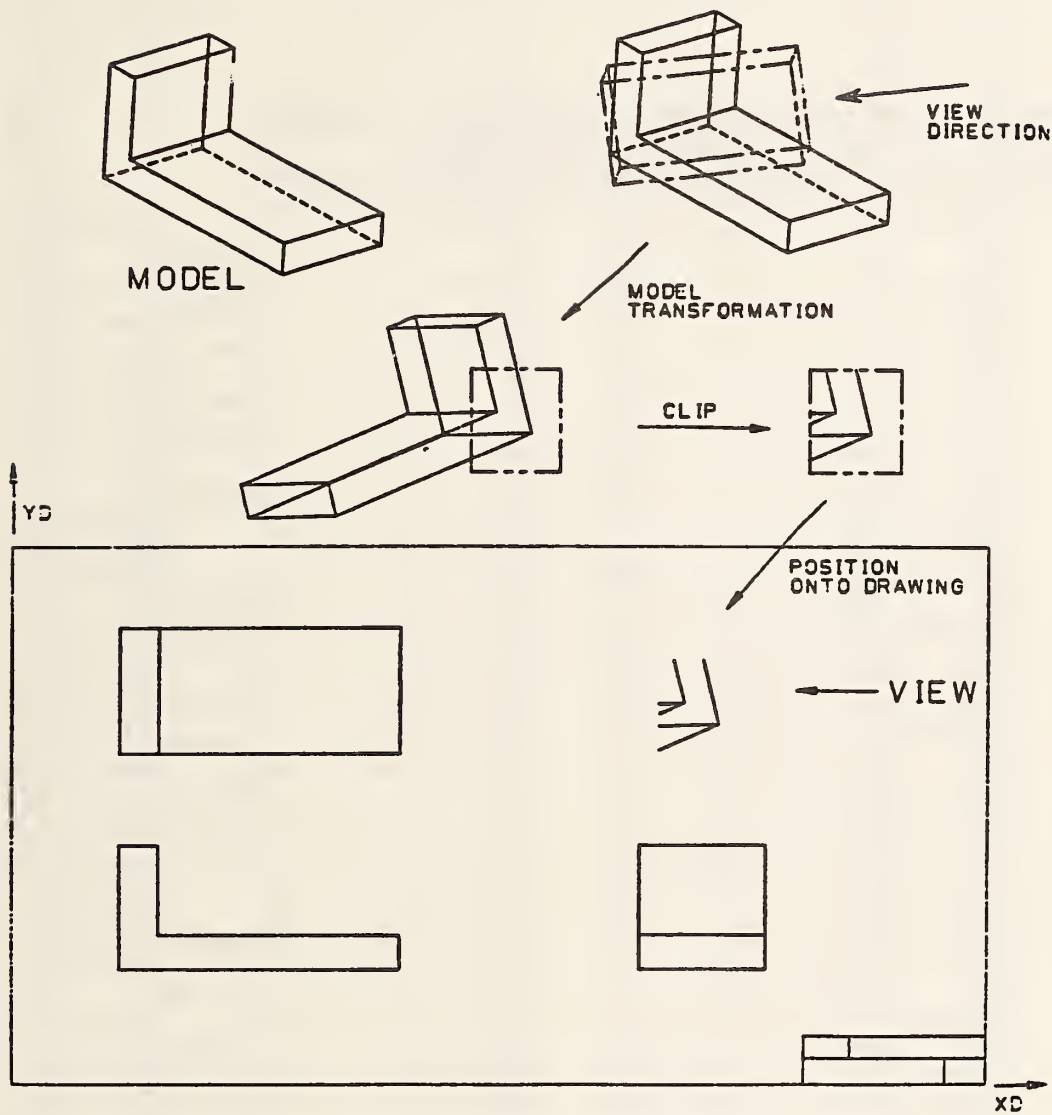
DRAWING AND VIEW EXAMPLE
